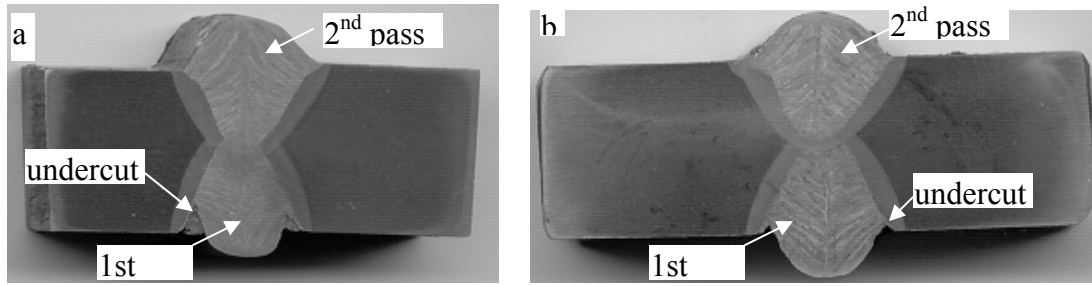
Undercuts developed in (a) SA516 weldment using 850A and 15.3 mm/s; (b) A709 weldment using 800A and 15.3 mm/s.
